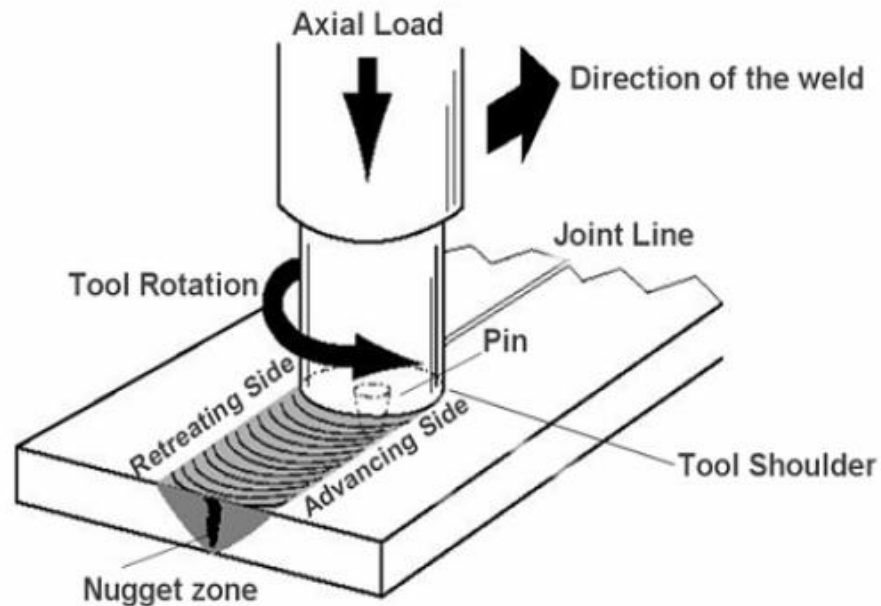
Schematic diagram of Friction Stir Welding (FSW) [14]
